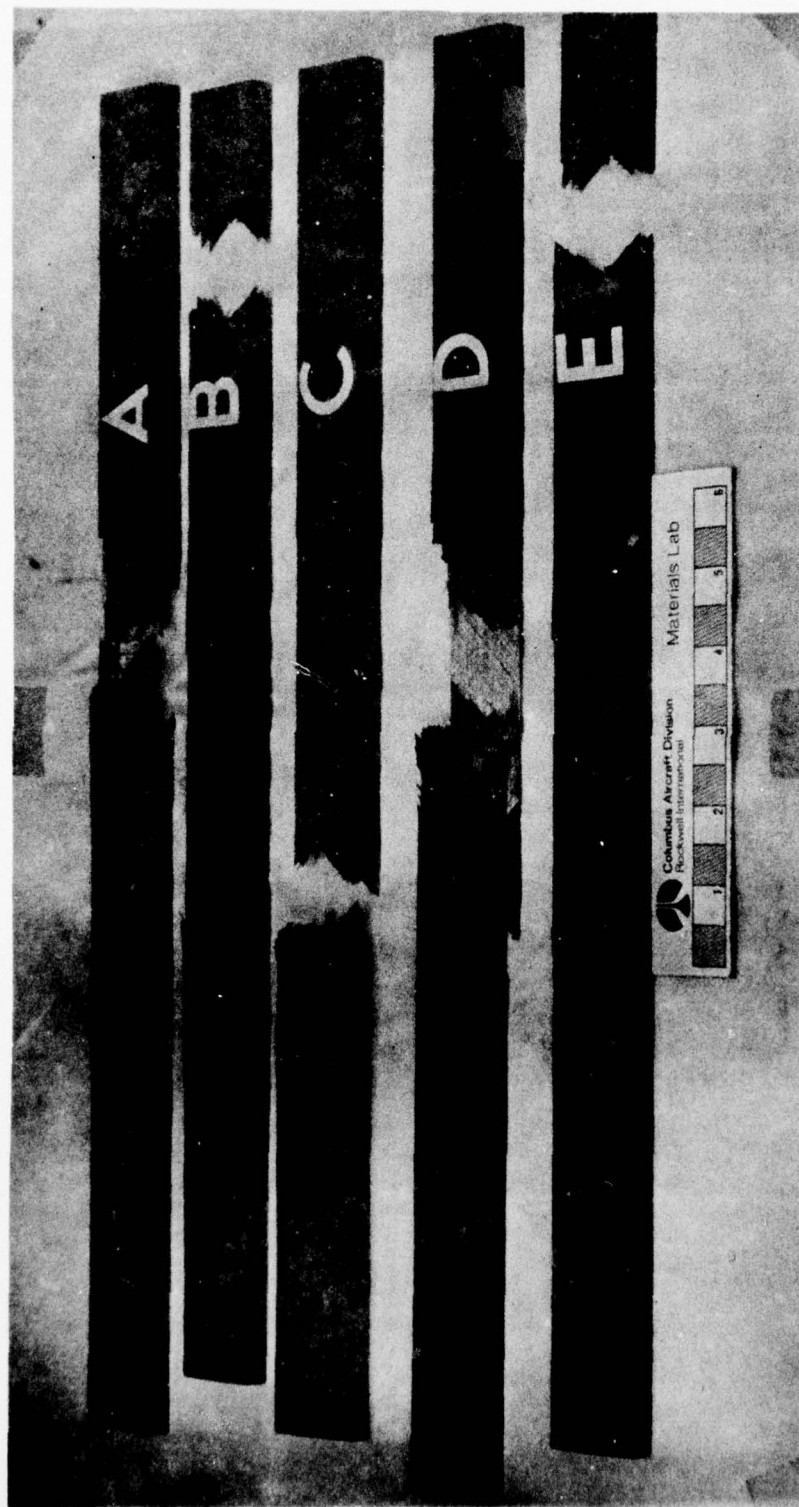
FAILED AXIAL LOAD SPECIMENS - PRECURED FACINGS WITH REVISED STACKING ORDER
